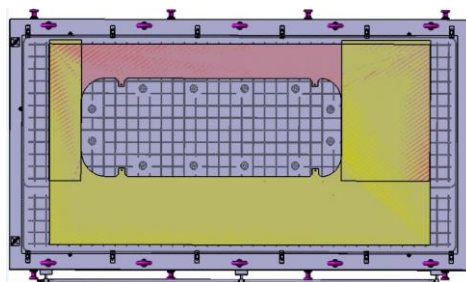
A vacuum milling fixture for aircraft skin manufacturing (simple)
